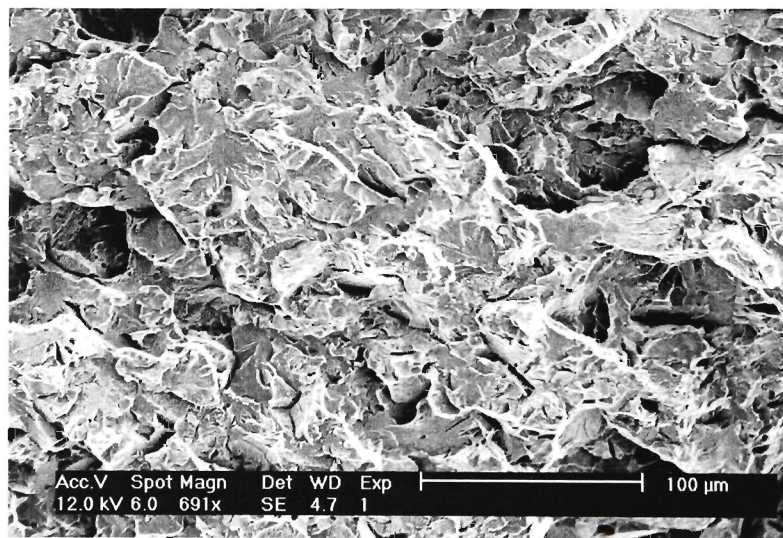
Rock bolt Fast Fracture Surface
